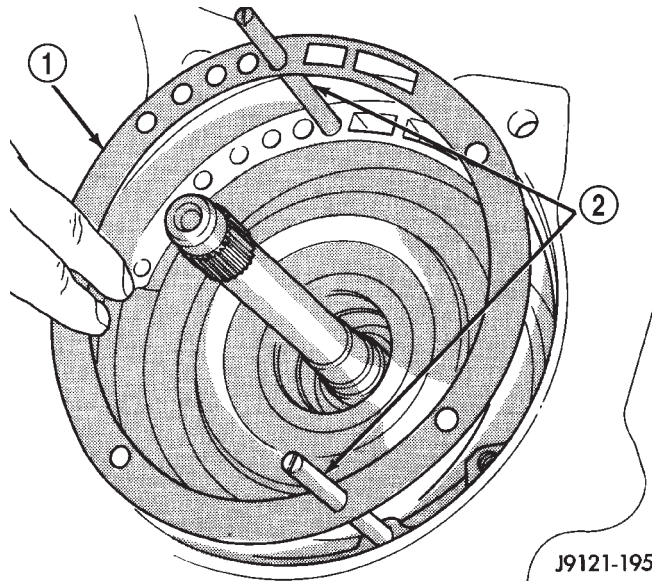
Installing Pilot Studs And Oil Pump Gasket
